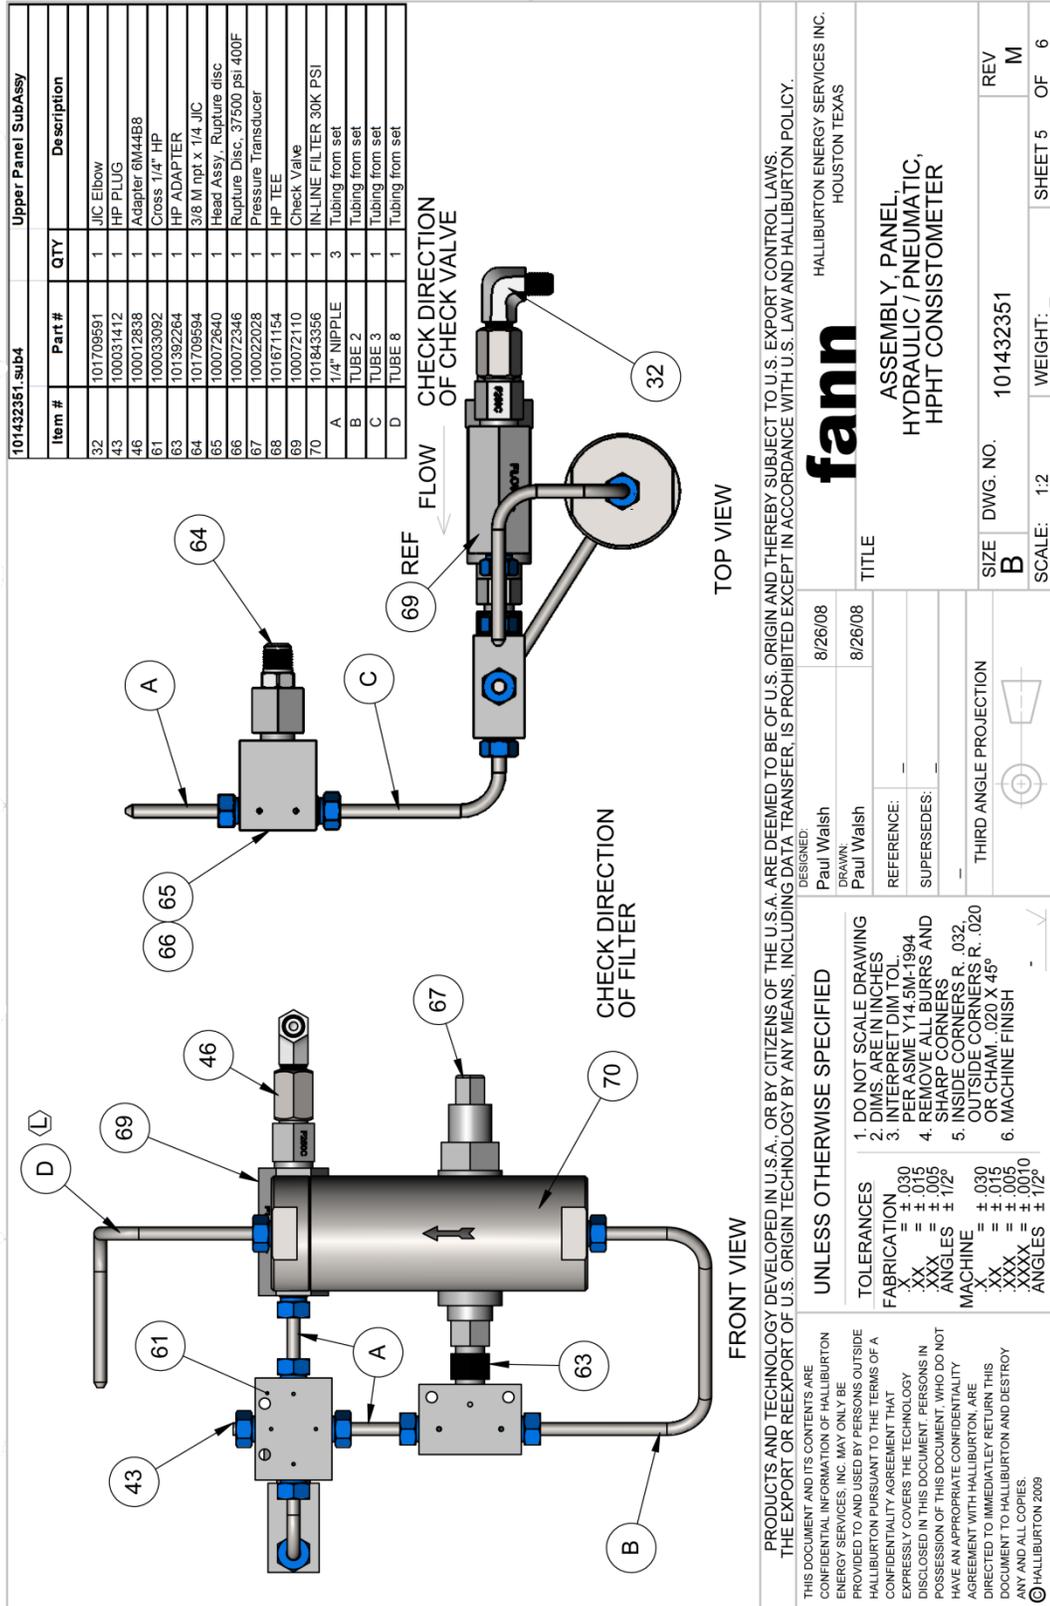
Hydraulic/Pneumatic Panel Assembly, 5/6
